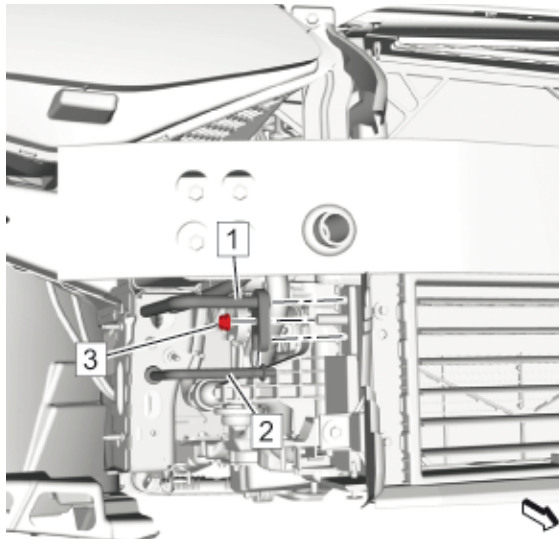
Air Conditioning Evaporator Tube, Condenser Tube And Nut
